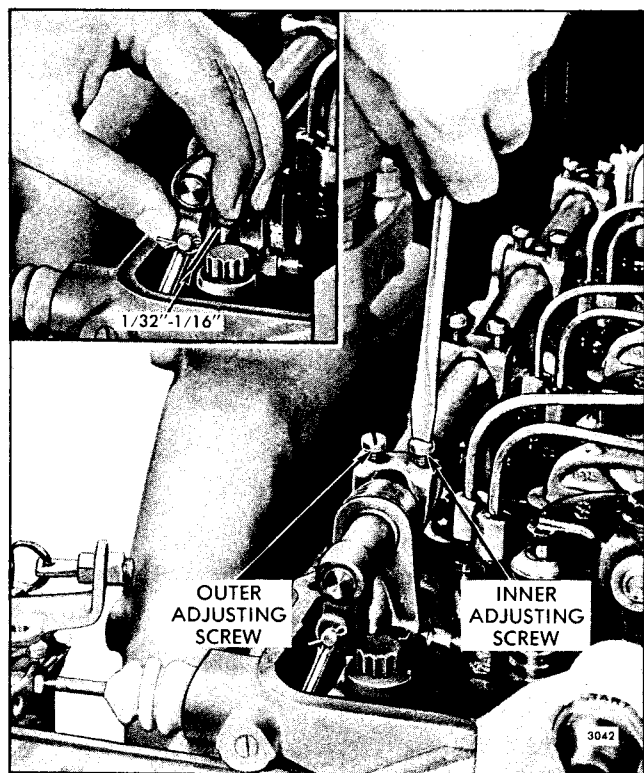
Adjusting Injector Rack Control Lever Adjusting Screws
